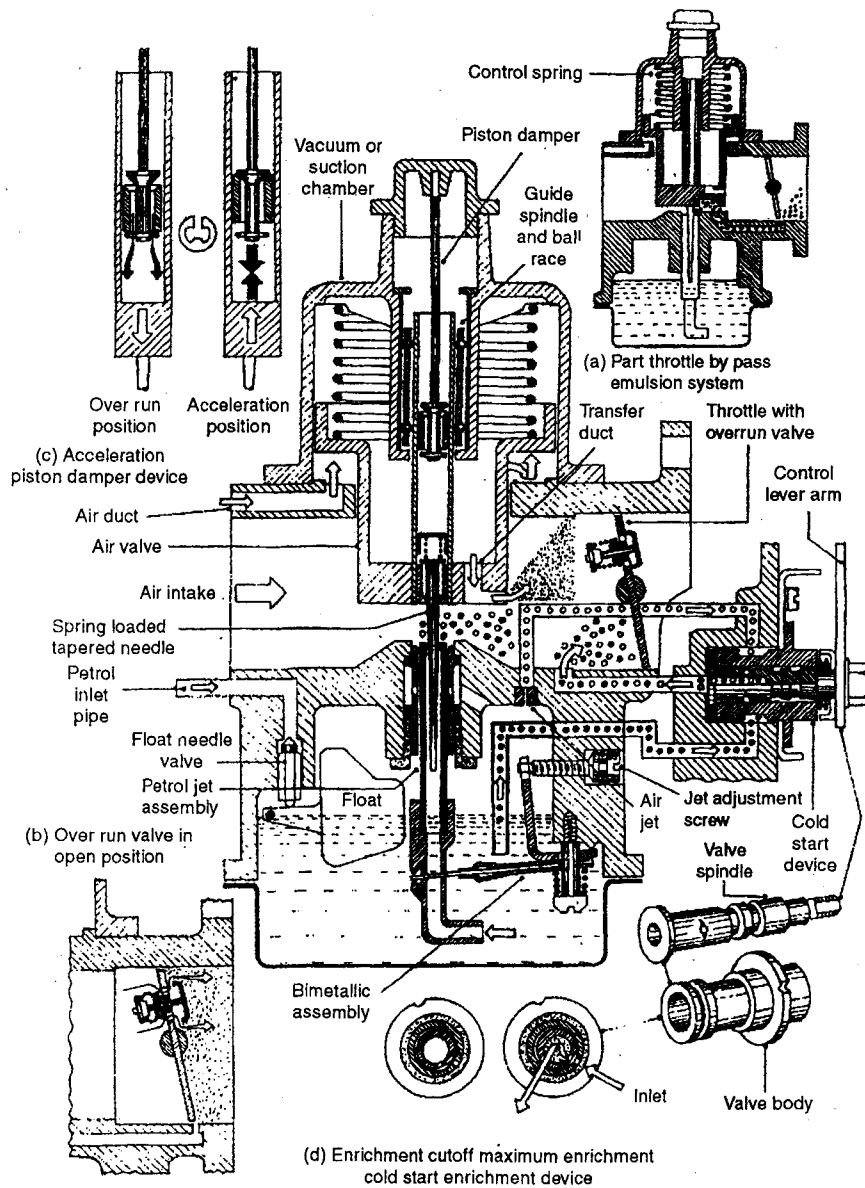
S.U. carburettor (constant vacuum variable choke).
